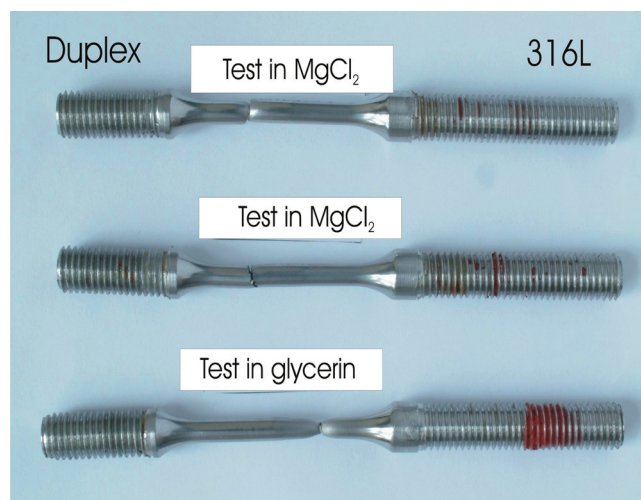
Samples with welded joints after slow strain rate tests
